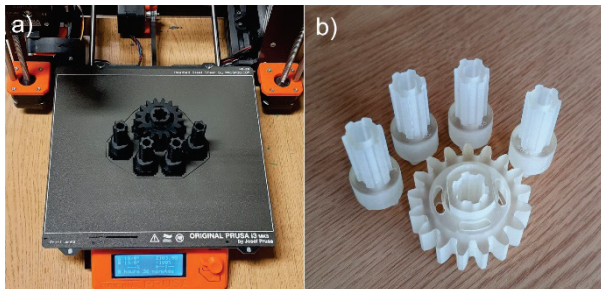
Research prototypes produced in technology: a) FFF, b) PolyJet
